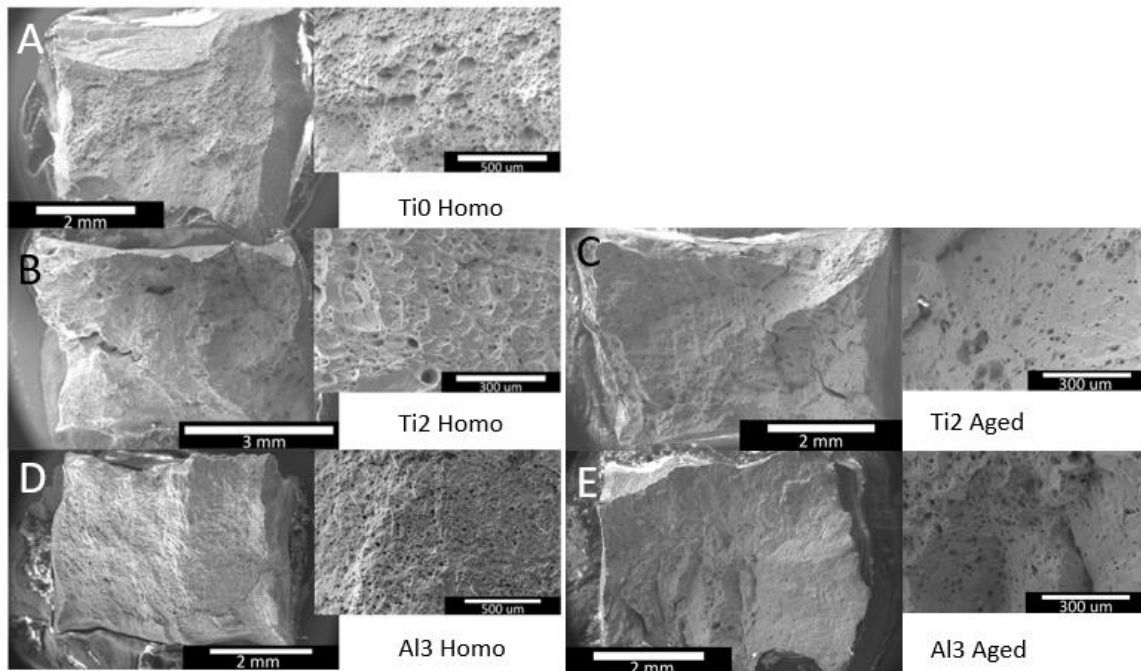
Shows the different fracture surfaces of the different alloys. A shows the fracture surface of the Ti0 system. B shows the fracture surface of the Ti2 system. C shows the aged fracture surface of the Ti2 system which can be seen is a lot smoother with few dimples. D and E show the Al3 system with Al3 homogenized showing a much more ductile matrix while E, the aged Al3 system shows a smoother surface with few dimples.
